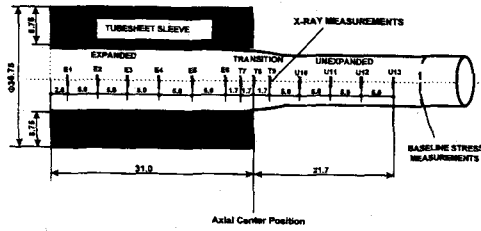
Schematic diagram showing residual stress measuring locations and tube-to-tubesheet joint mockup.
